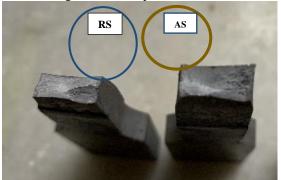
Fracture of three flat threaded tensile specimen at 1000 rpm
